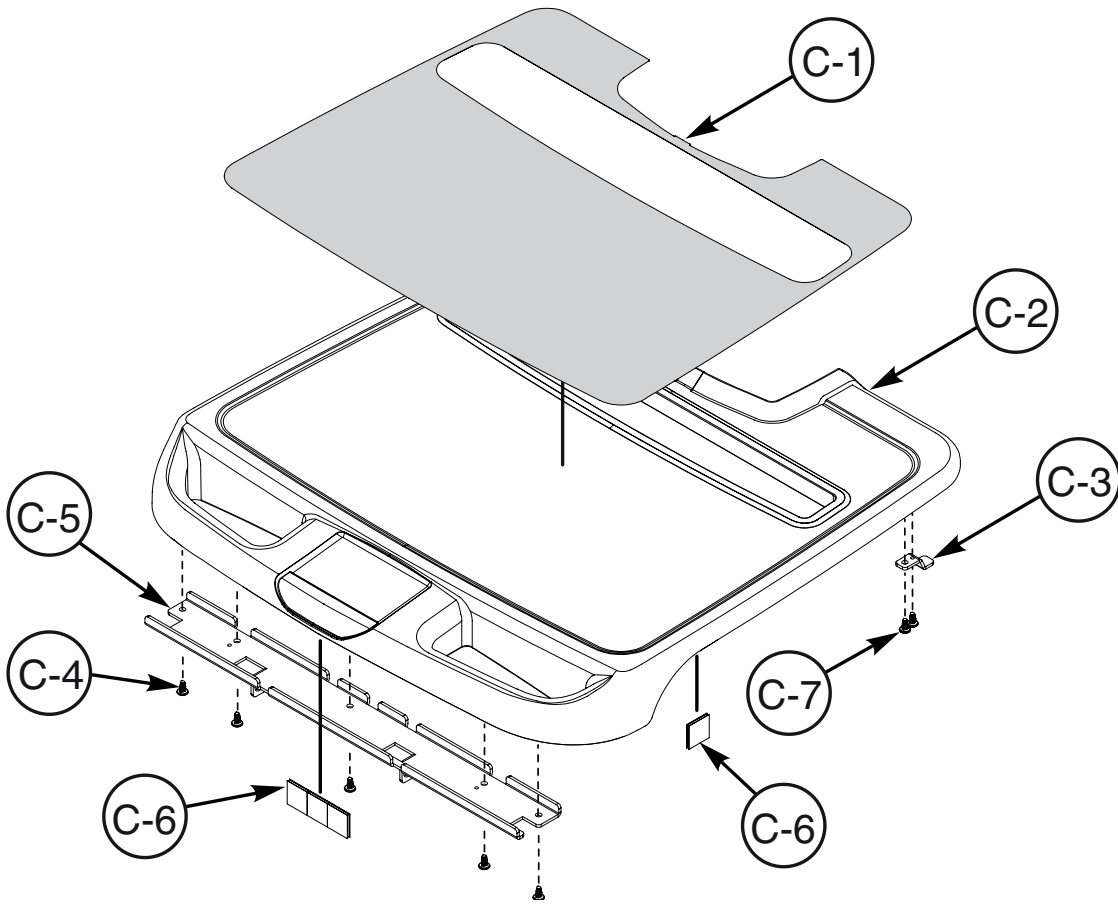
FIGURE C: LAPTOP WORKSURFACE ASSEMBLY
